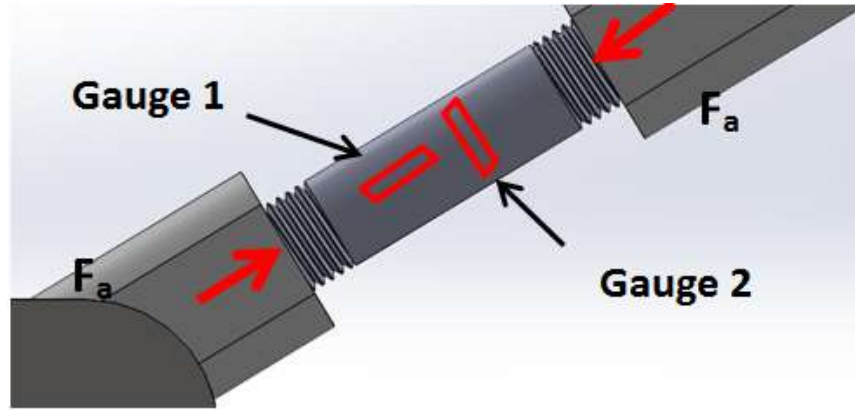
Desired strain gauge configuration and placement. Gauge 1 will be placed axially and Gauge 2 placed transversely.
